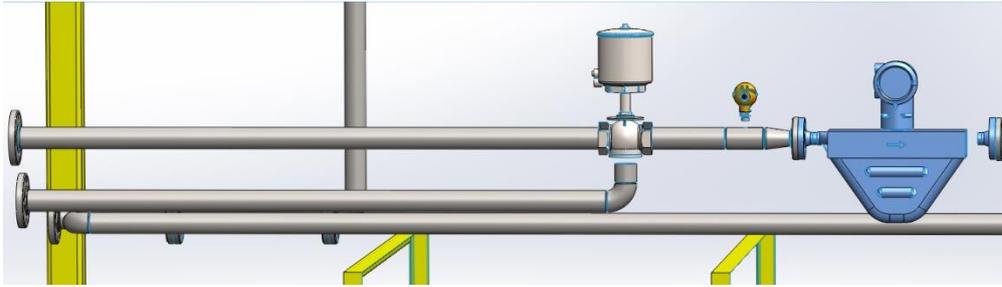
Original design with mixing valve on the inlet of CSL.
